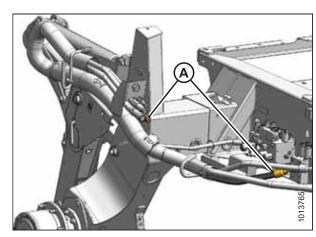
Auger Header Drive and Draper Header Reel Drive and Lift Plumbing Kit (MD #B4651)
